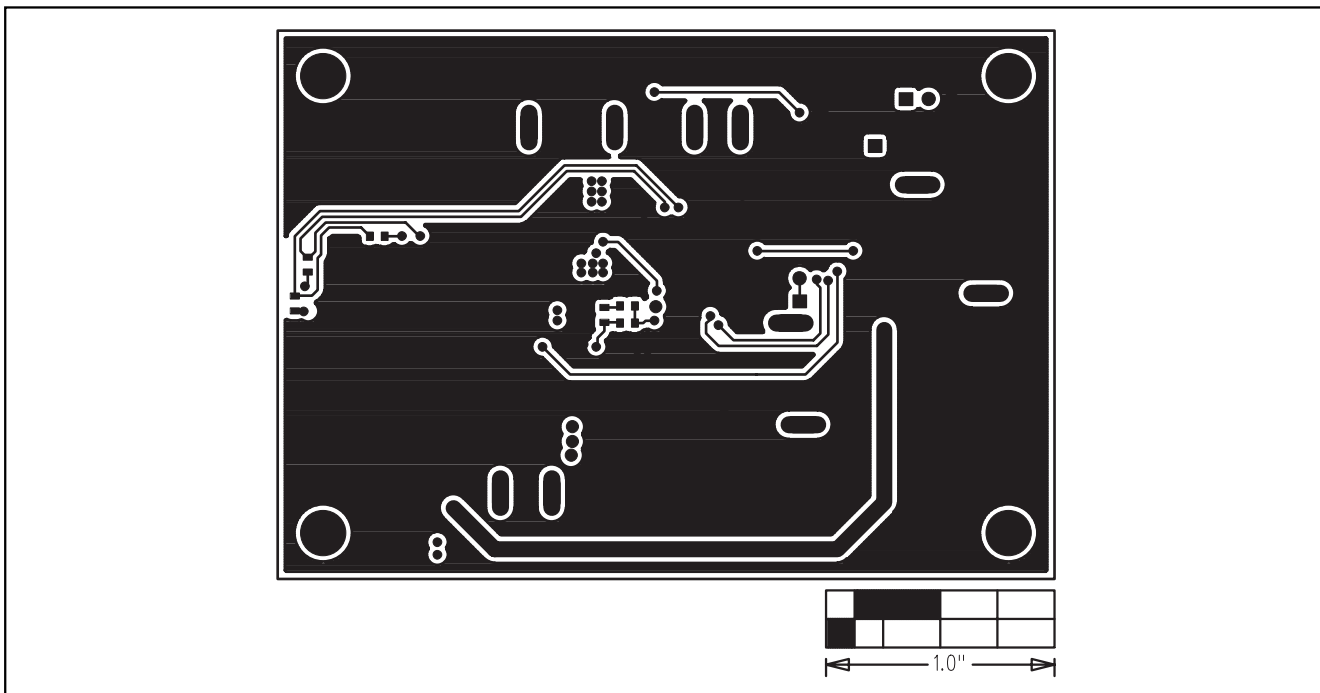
MAX8513 EV Kit PC Board Layout—Solder Side
